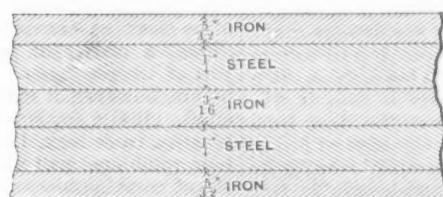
Section of 1-Inch Five-Ply Plate.—Full Size.
